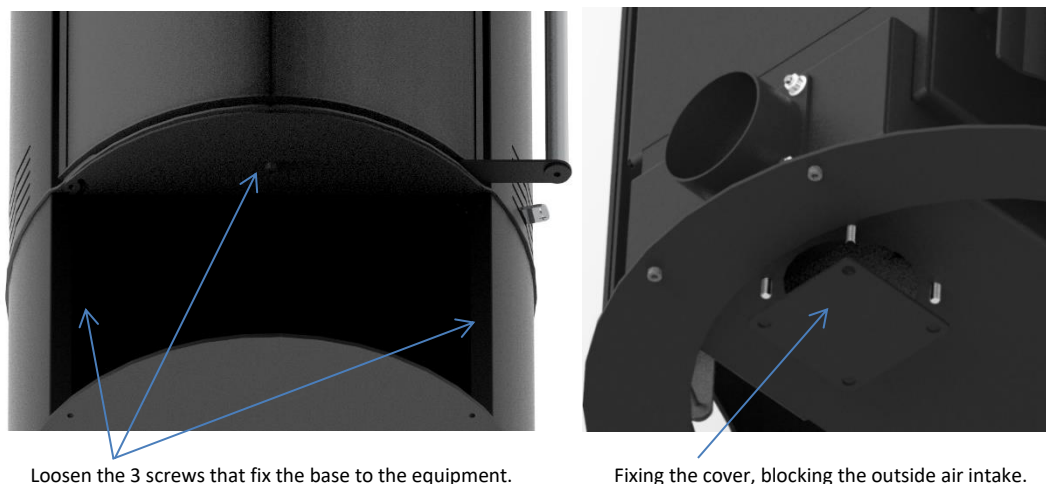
Bottom view of the equipment, blocking the external air intake under the equipment
